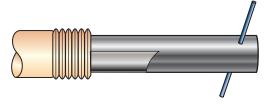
Damaged torch seats can be repaired by using a reamer.
